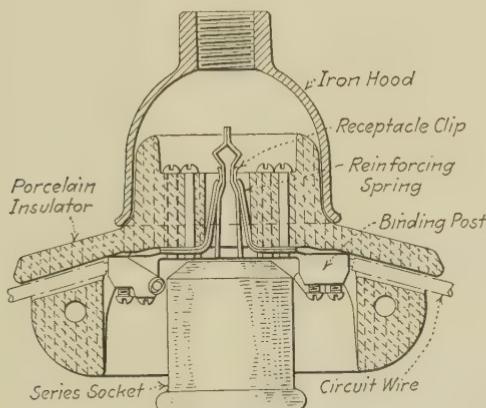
Cross section of hood and insulator for series bracket showing external wiring.
